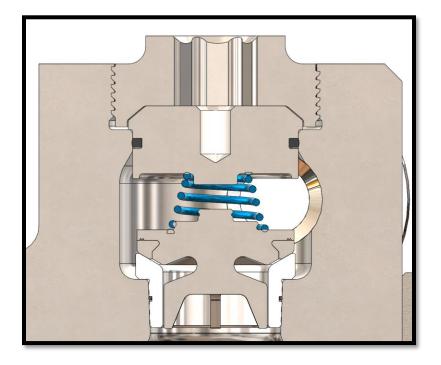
Discharge cover & retaining nut cross section view fully assembled into fluid end
